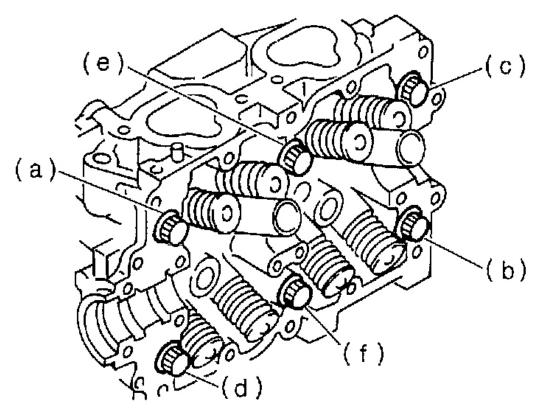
Removing Cylinder Head Bolts In Sequence Courtesy of SUBARU OF AMERICA, INC.
